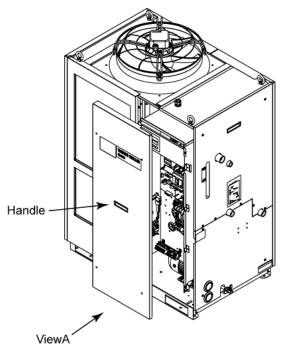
Remove the front panel of the electrical unit (This drawing shows air cooled type.)
